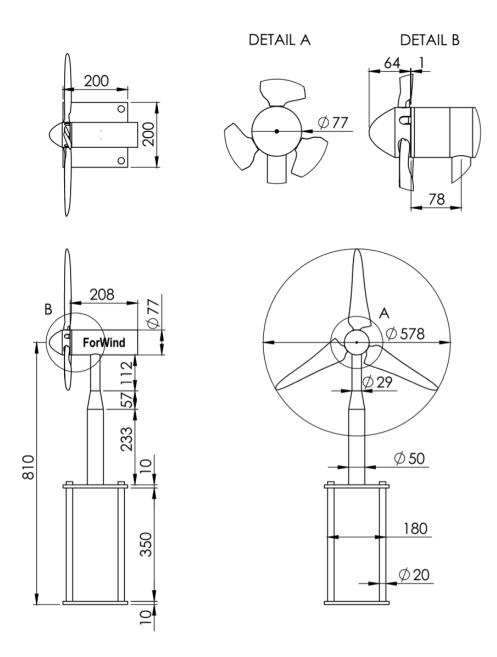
Technical drawings of the ForWind turbine, measures in mm.
